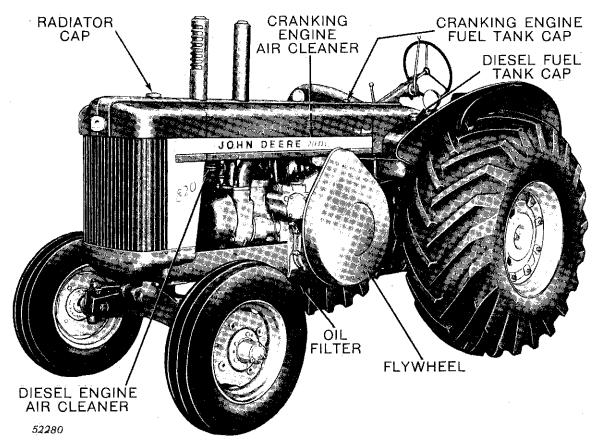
John Deere "820" Series Diesel Tractor-Flywheel Side
